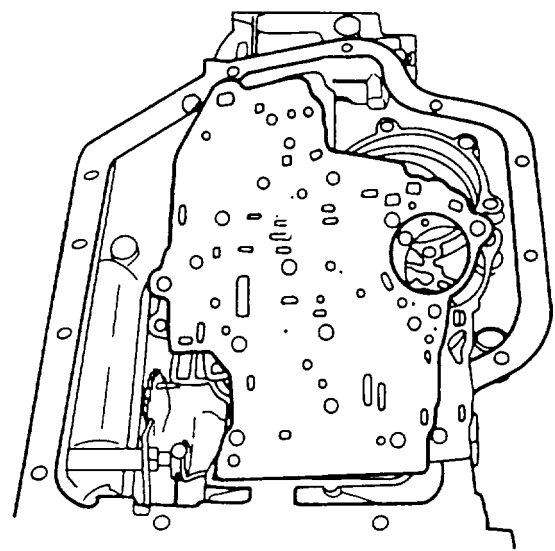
Removing the control valve spacer. (The check balls are here.)
